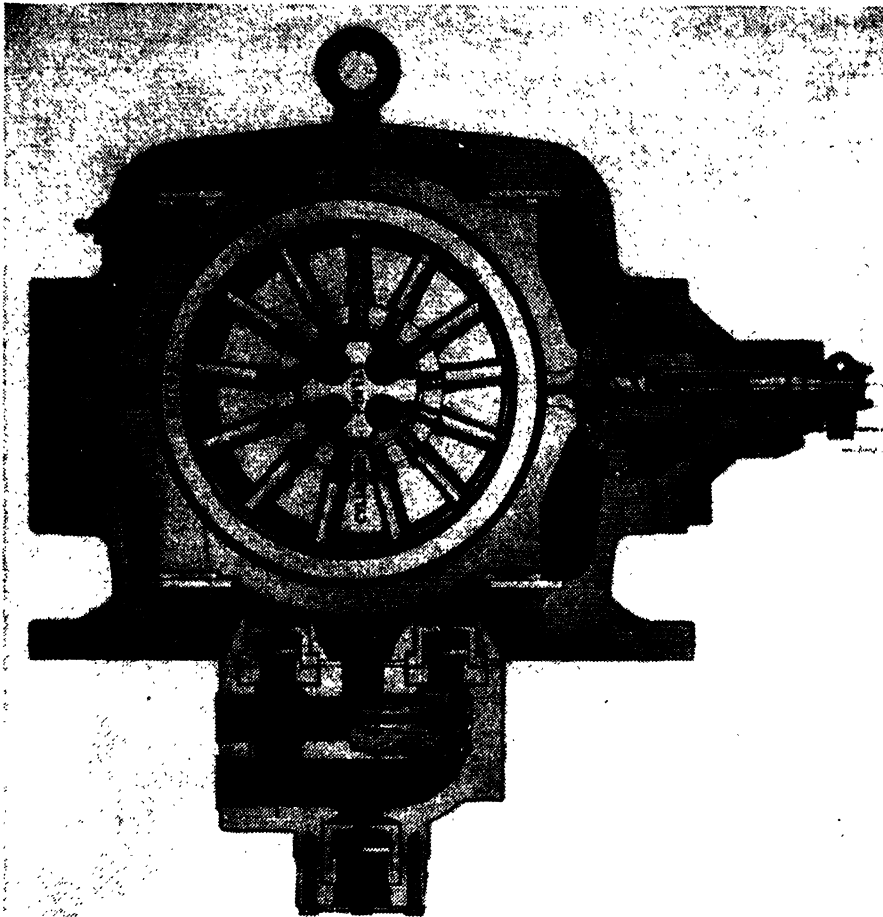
Oilgear pumping unit with make-up check and relief valves. (*The Oilgear Co., Milwaukee, Wis.*)
